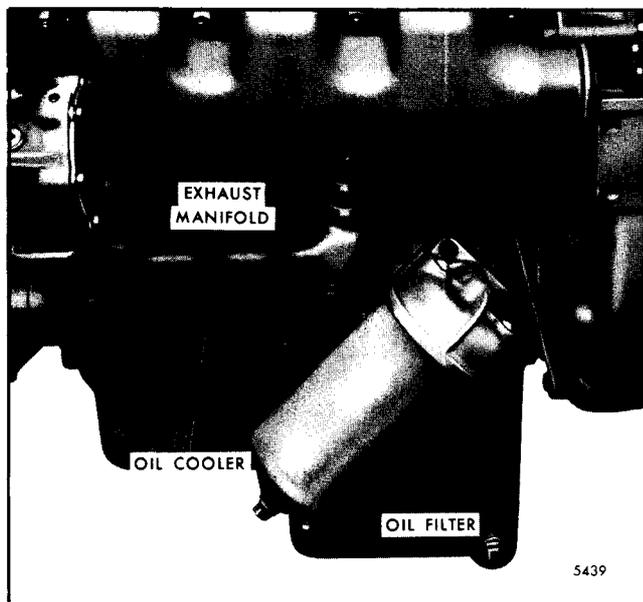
Typical Full-Flow Oil Filter Mounting (6V Engine Shown)
